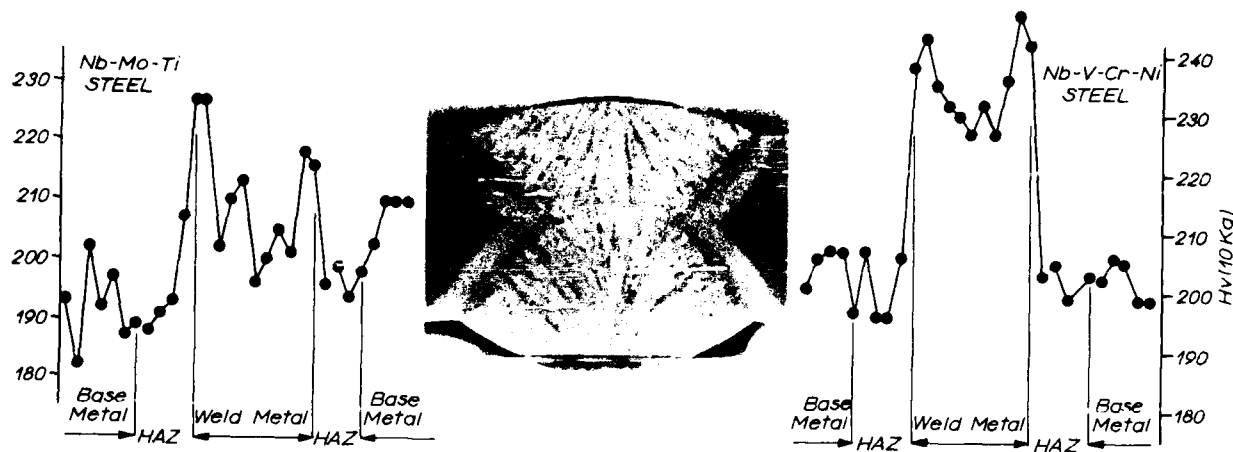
PROFILE OF HARDNESS ACROSS WELDED JOINT IN BOTH STEELS
